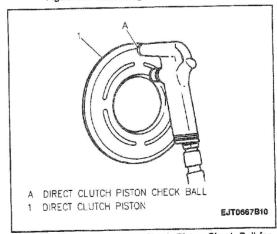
Checking Direct Clutch Piston Check Ball for Leakage
